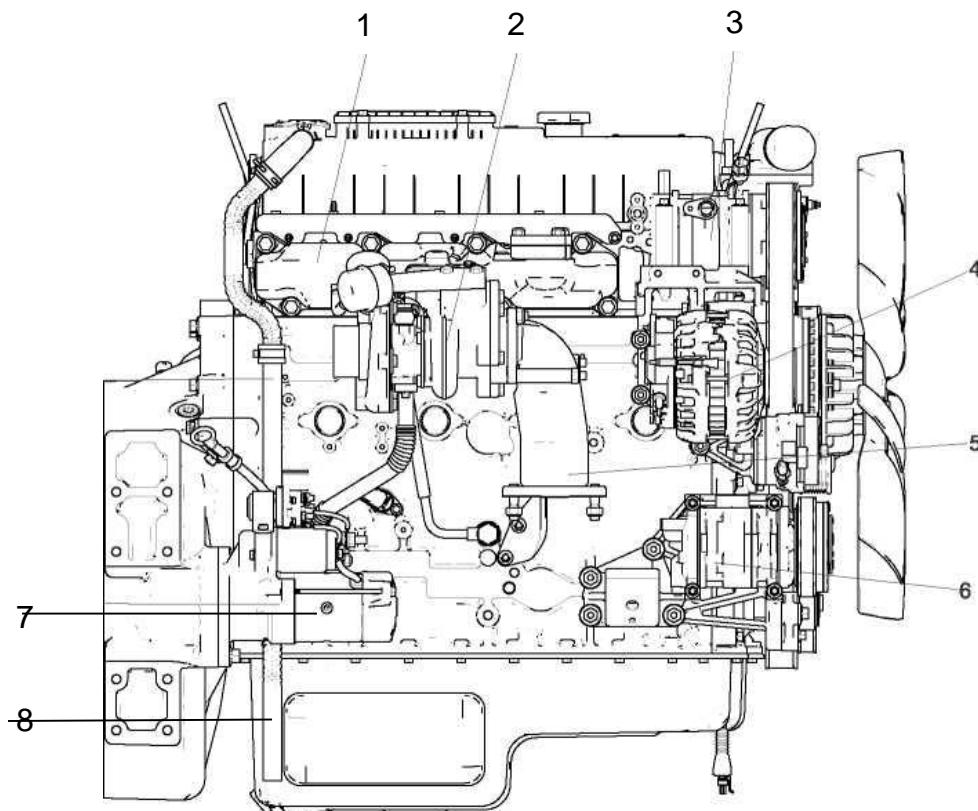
Side face of Euro IV standard WP4 electronic oil pump diesel engine
